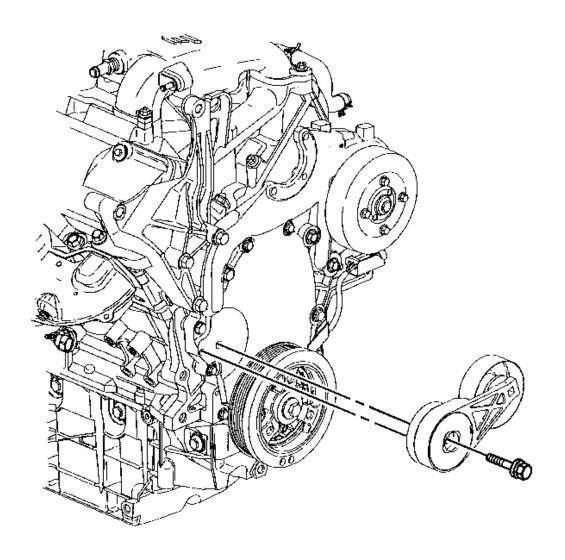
Removing Drive Belt Tensioner Courtesy of GENERAL MOTORS CORP.
